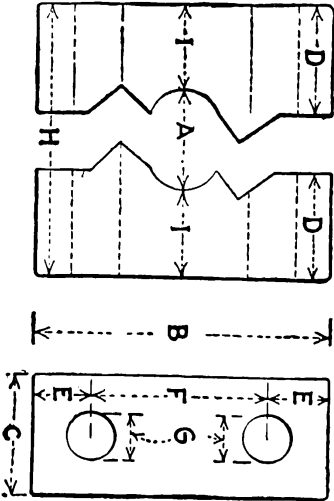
E.—Showing cleats the dimensions of which are given in Table 16I.
